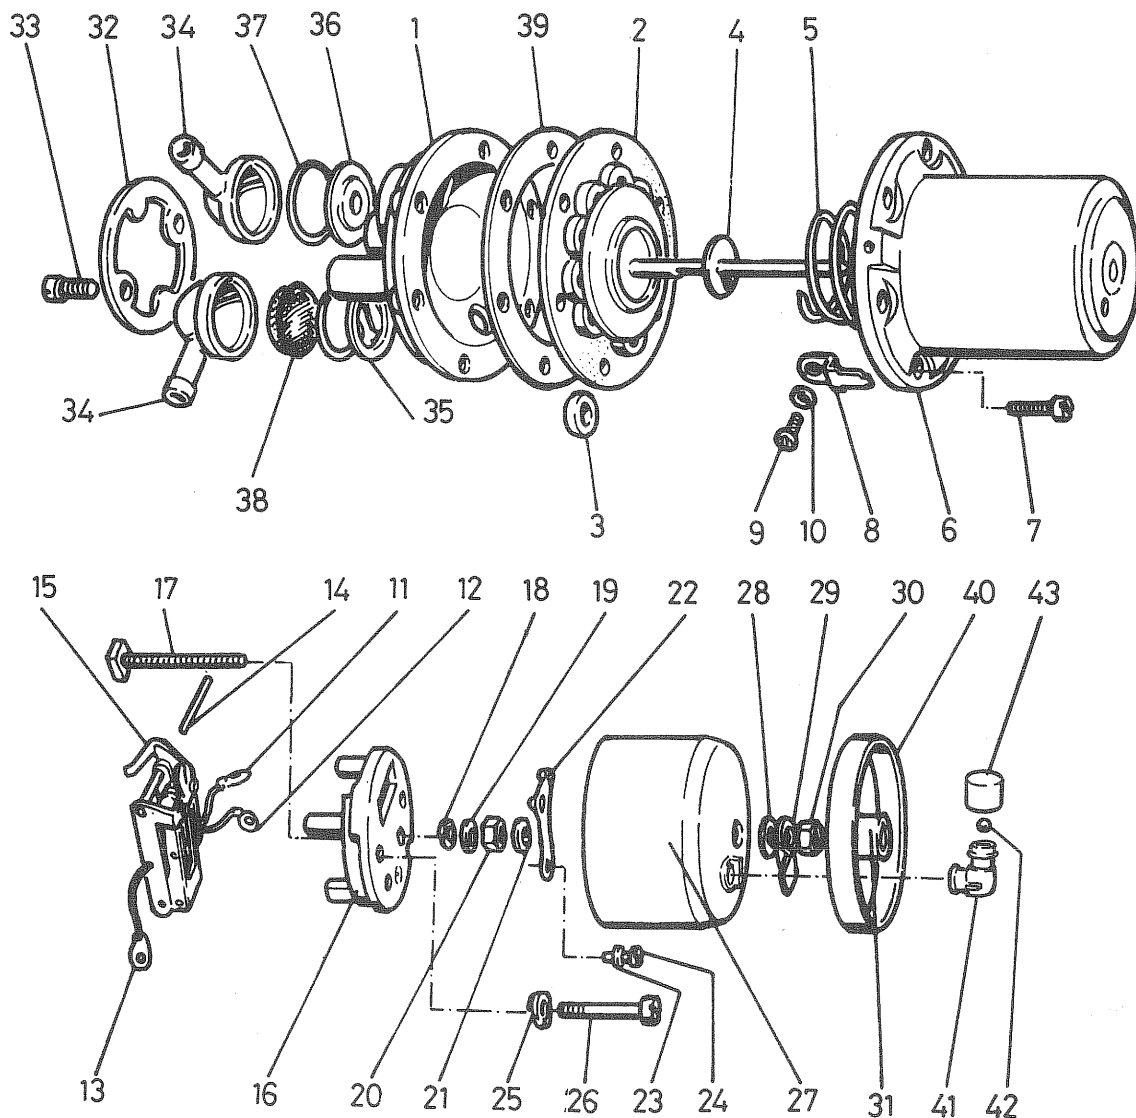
Exploded view of the electric fuel pump (Sec 5)
